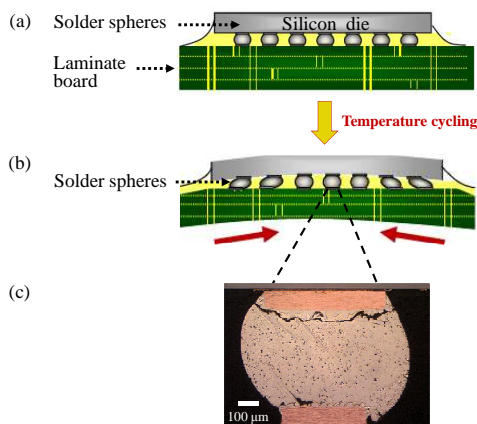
a* Schematic of a ball grid array (BGA), type of surface mount technology (SMT) electronic package, showing the chip, the PCB and the array of solder balls, with typical dimensions; *b* optical micrograph of failure in a SAC387 ($\text{SnAg}_{3.8}\text{Cu}_{0.7}$) ball-grid-array (BGA) electronic package due to thermal cycling at 0-100°C. [3]
